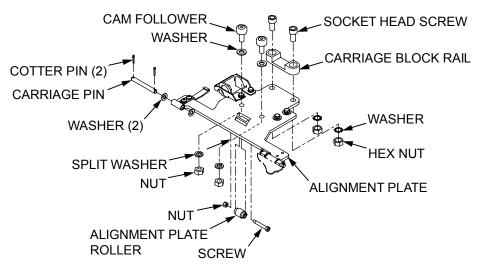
ALIGNMENT PLATE ASSEMBLY
